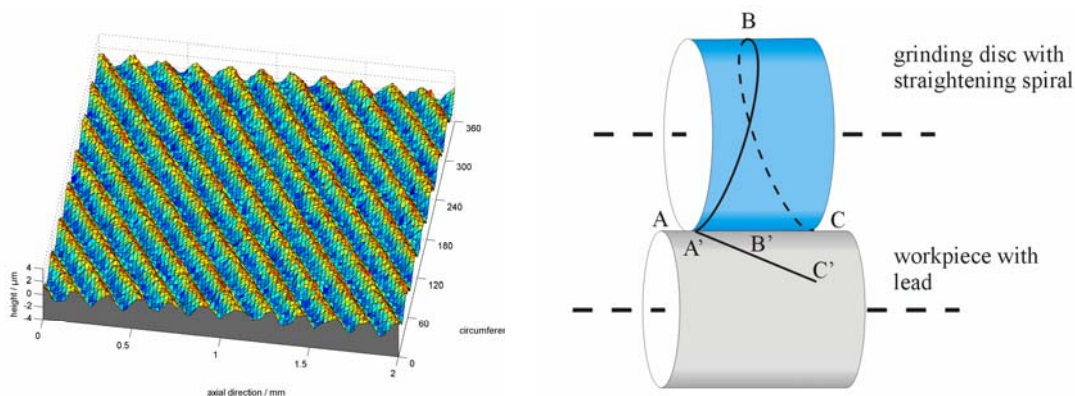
(left) ground surface with macro twist, (right) projection of the dressing spiral onto the work piece.
